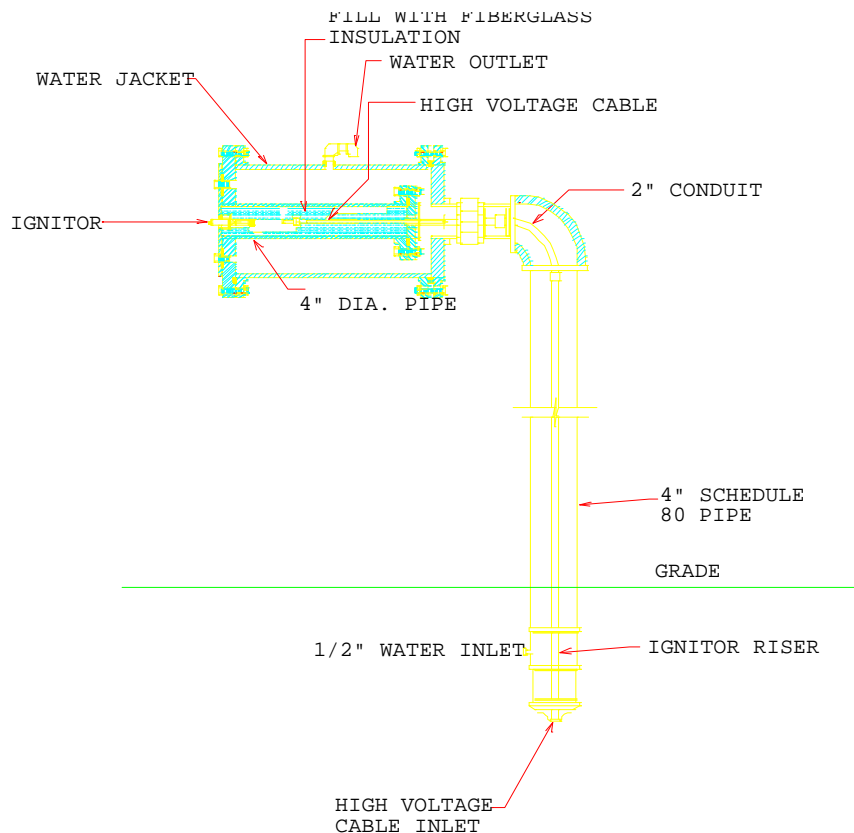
TYPICAL IGNITOR WATER JACKET ASSEMBLY
